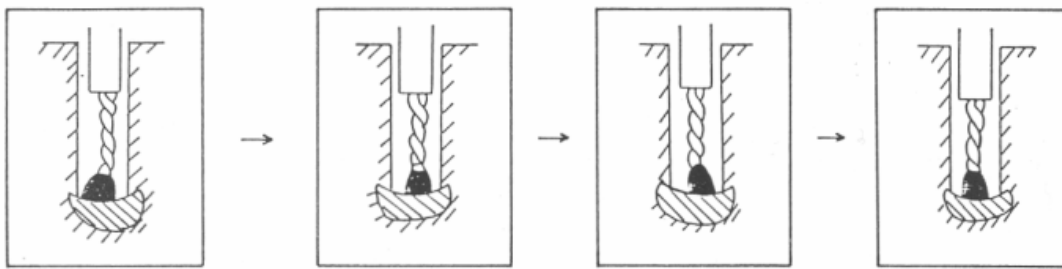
Rotational movement of welding arc produced by Twist-arc [93]
